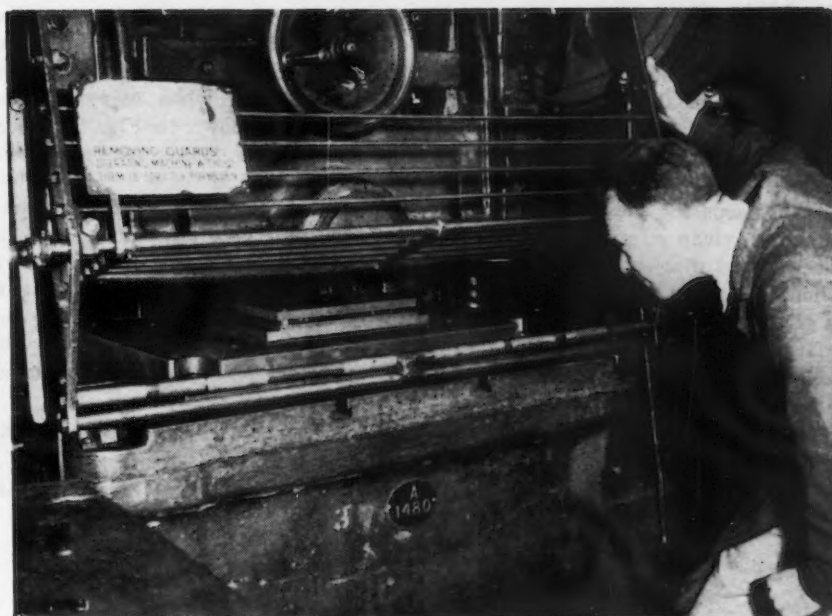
The completed blanking die is mounted in a press and the punch sheared into the die for approximately  $\frac{3}{16}$  in.
